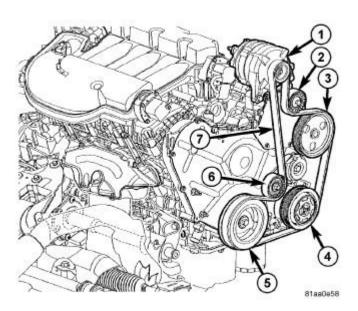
Identifying Accessory Drive Belt & Pulleys Courtesy of CHRYSLER LLC
